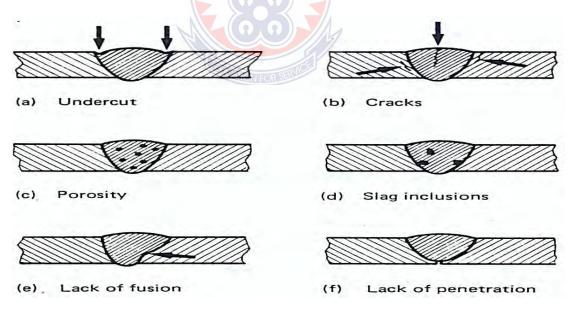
Cross-sections of welds containing typical defects (Gourd, 2014).
